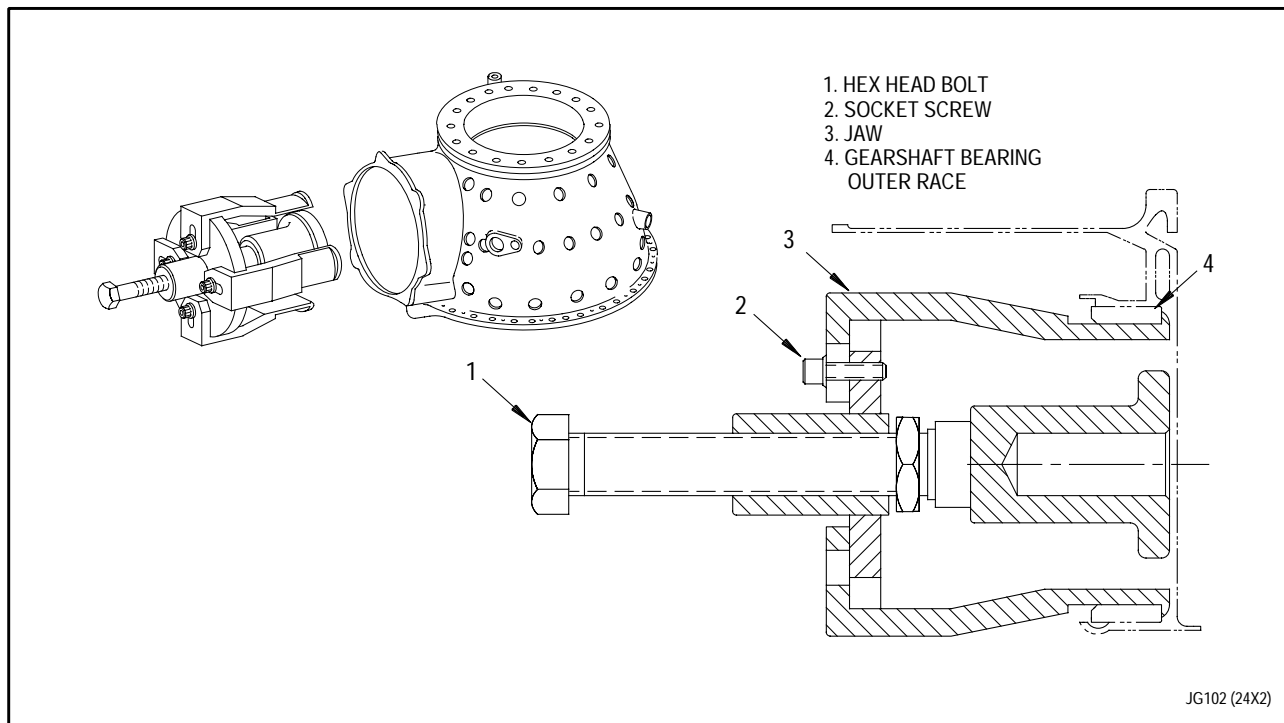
Gearshaft Bearing Outer Race - Removal With PWA 50681 Puller
